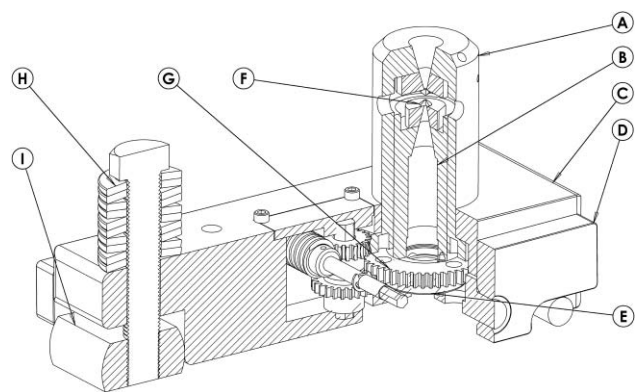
Cutaway view of rotational DAC. A indicates the diamond anvil cylinder, B is the diamond anvil piston, C is the cell body, D is the lever arm, E is the thrust bearing, F is the diamonds and tungsten carbide mounts, G is the gear assembly for the rotational cell, H is the Bellville washer and bolt assembly, and I is threaded load block for loading the lever arms.
